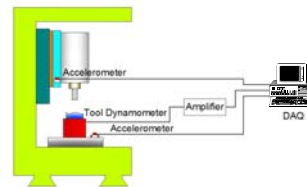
Monitoring system layout using accelerometer and tool dynamometer
